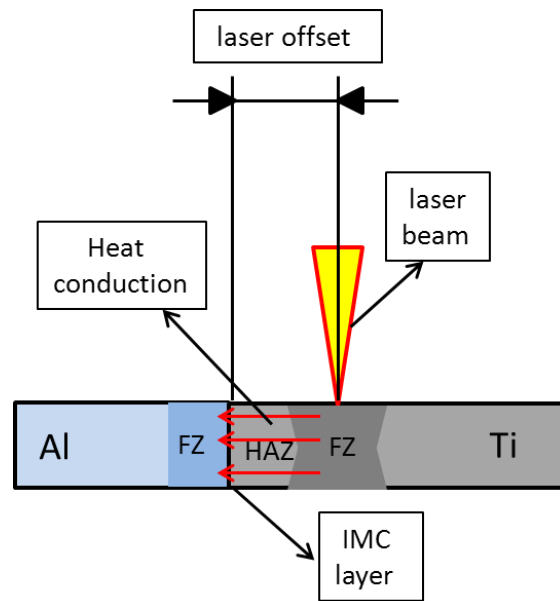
Laser offset welding configuration for Al-Ti dissimilar butt joints
